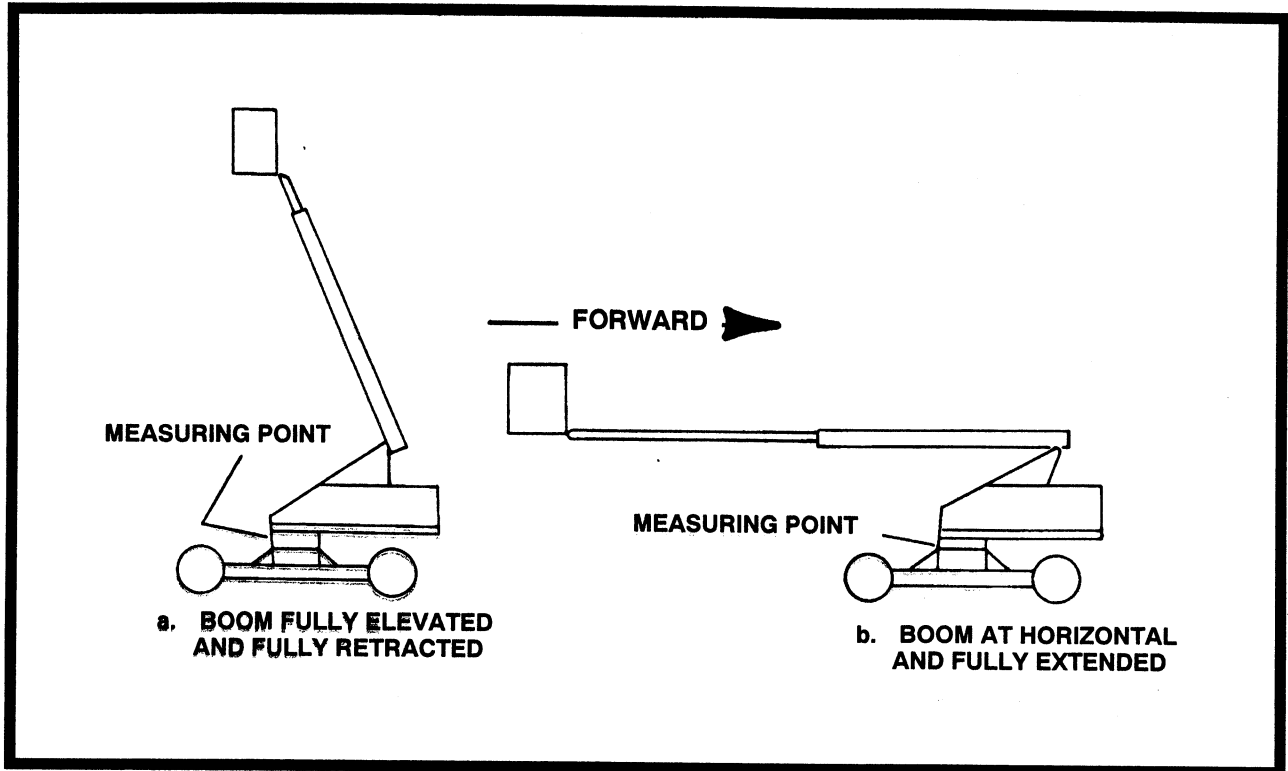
Swing Bearing Tolerance Boom Placement.
